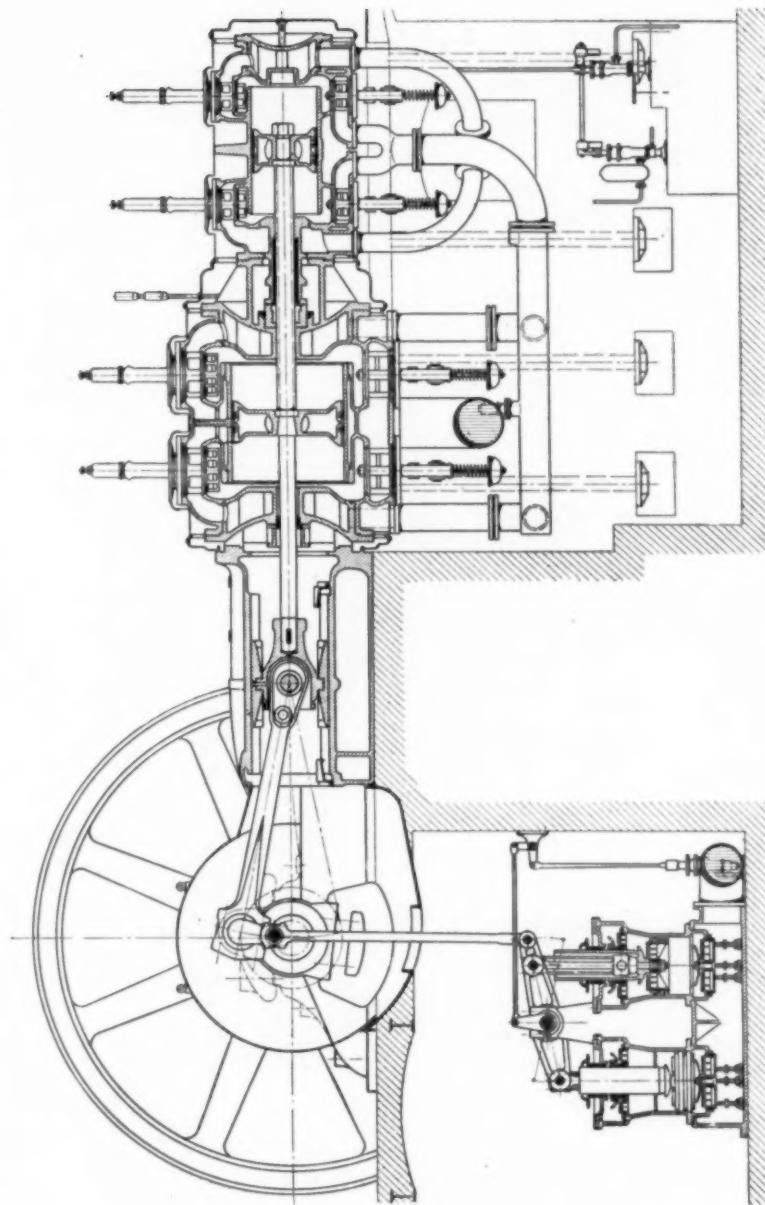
TWIN-TANDEM ENGINE, LONGITUDINAL SECTION
